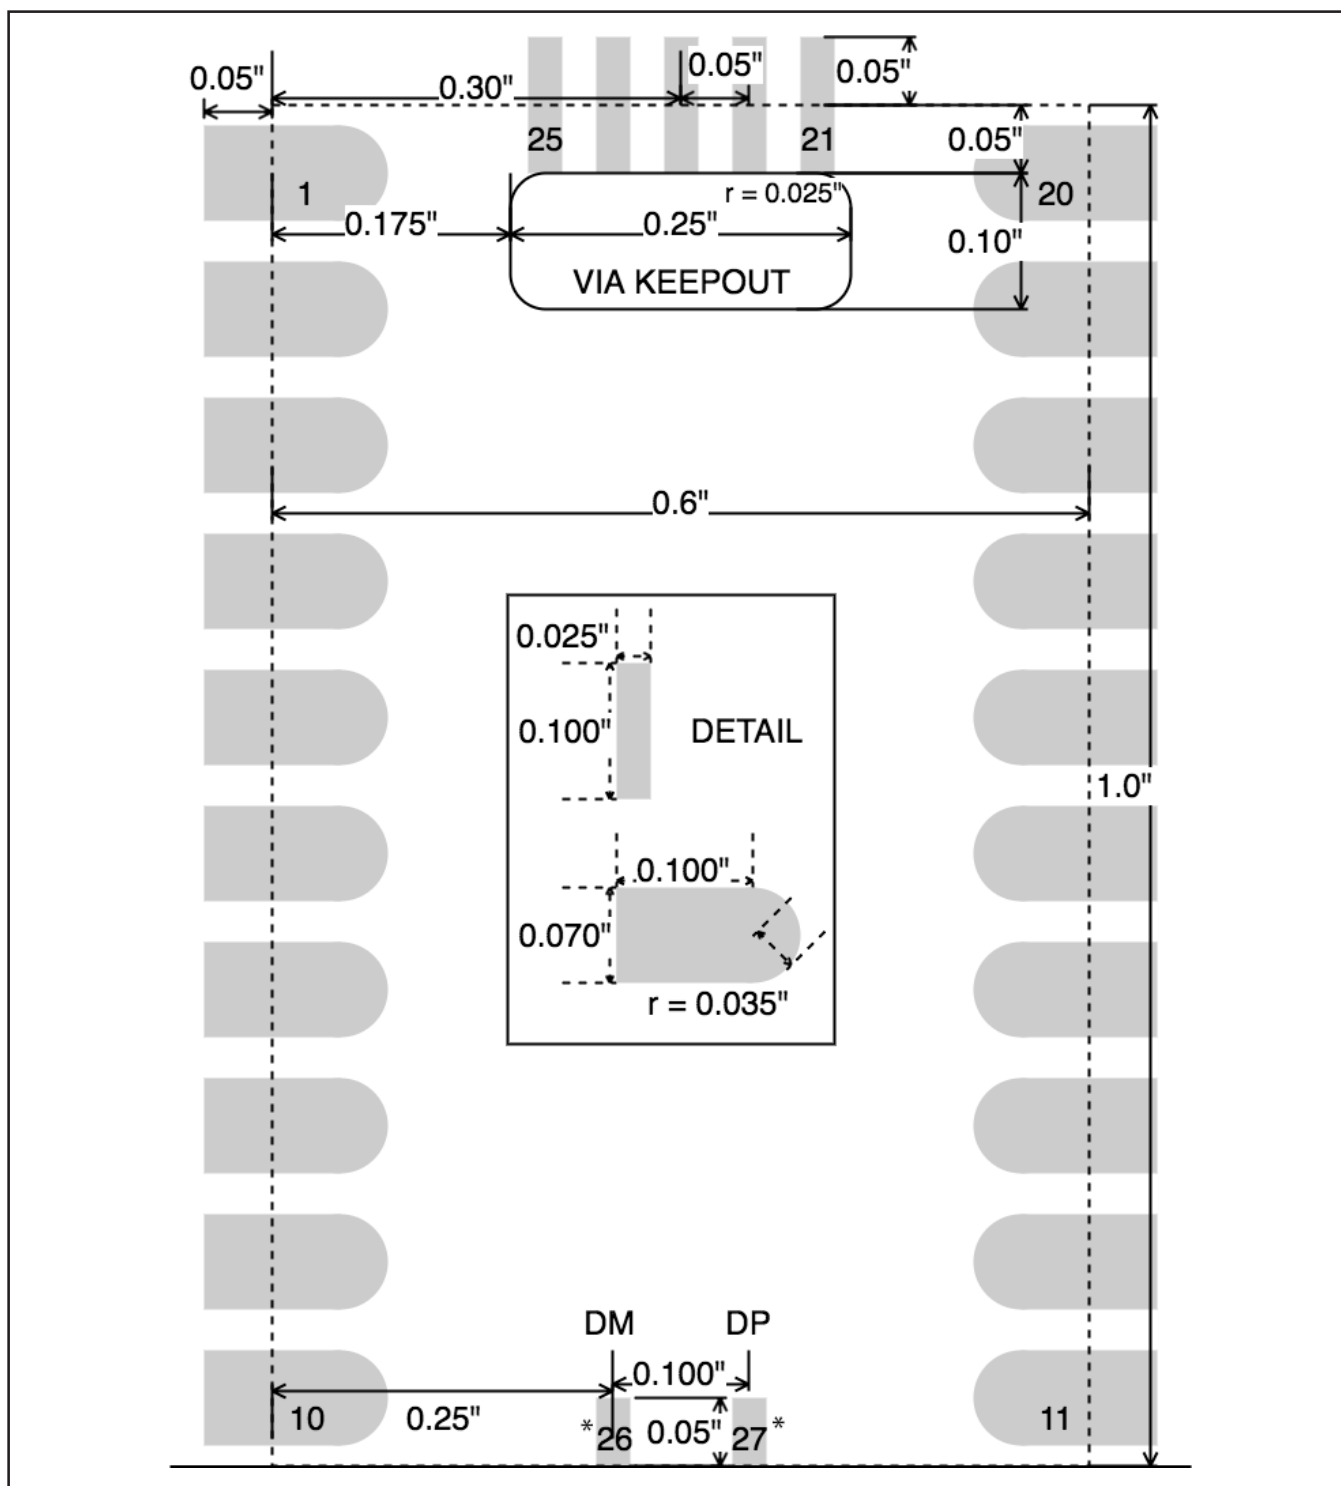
MAX32625PICO Surface Mount Footprint, Edge Pads
